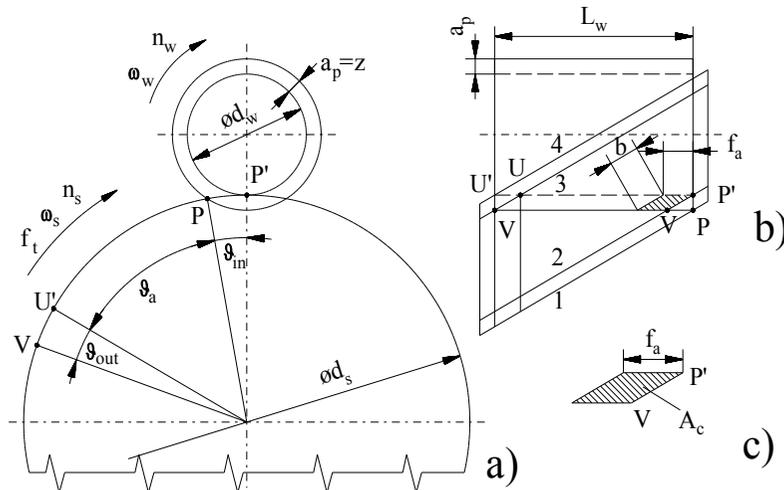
a – motions in plane perpendicular on axle; θ – typical positions of tool edge; c – approximate shape of chip cross section
